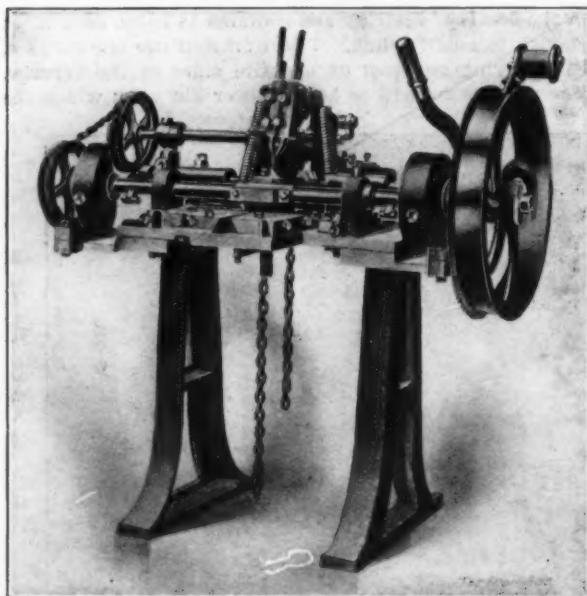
A No. 3 Giraud Welding Machine.—Capacity, 4000 Links of 9-32-Inch Chain Per Day.
